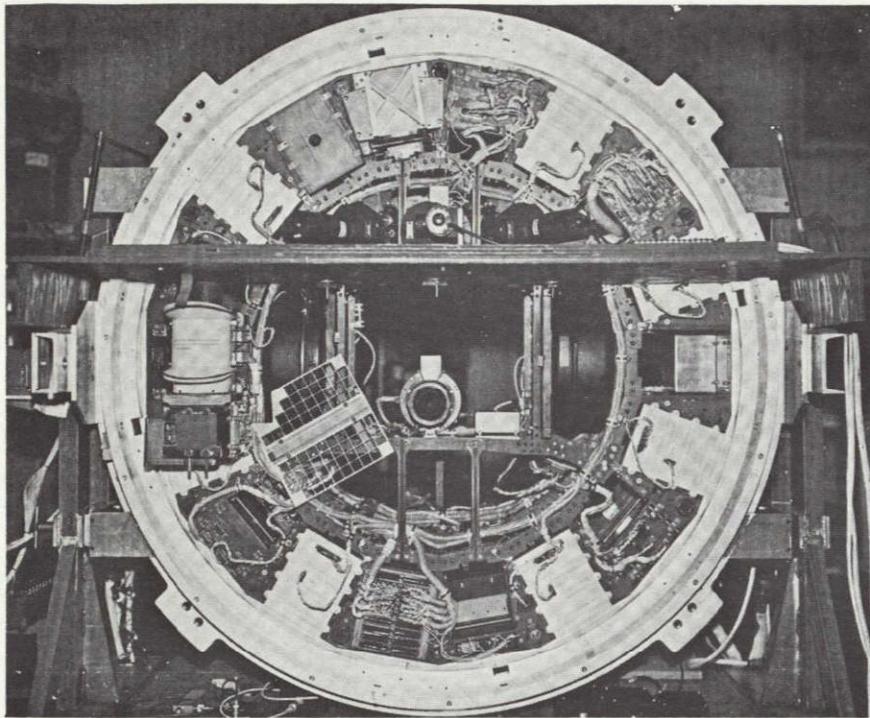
Nimbus A Component Locations in Sensory Ring - Bottom View
